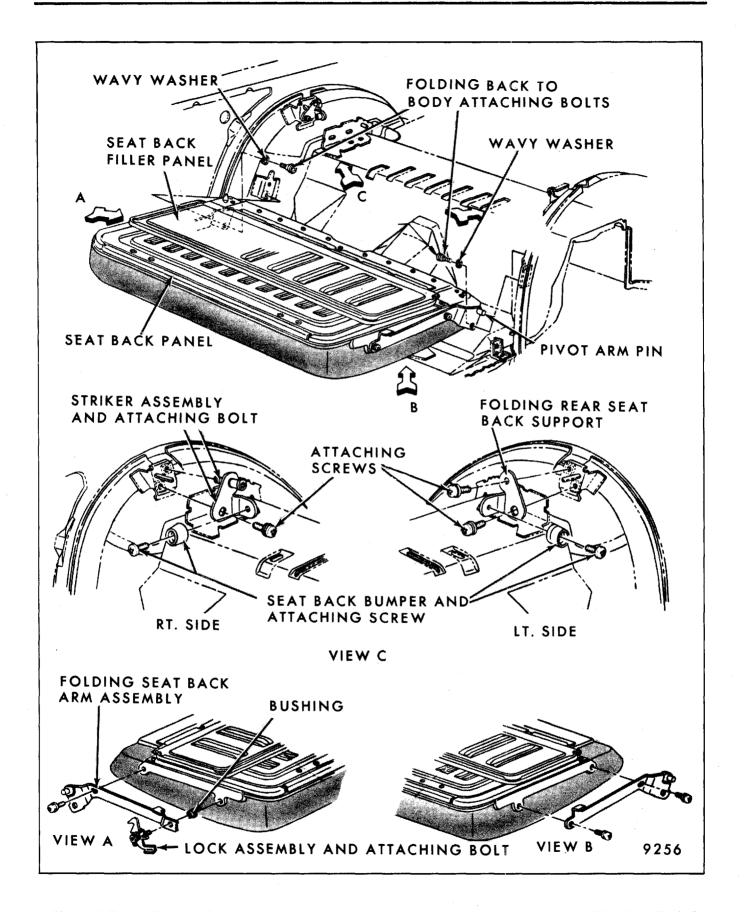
Folding Rear Seat Back and Lock Installation Assembly - H-07, 15, 27 and 77 Styles Shown (X-17 Styles Typical)
